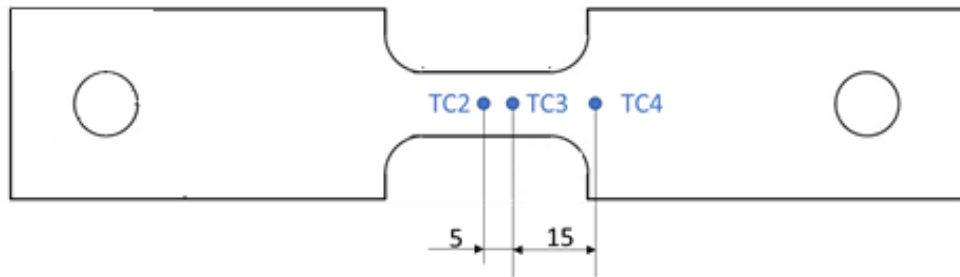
Position of thermocouples welded on the specimen for Gleeble test
